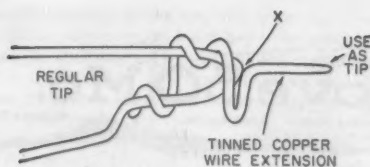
Sketch showing how W5CYF extends the usefulness of a soldering gun by extending the length of the tip.
